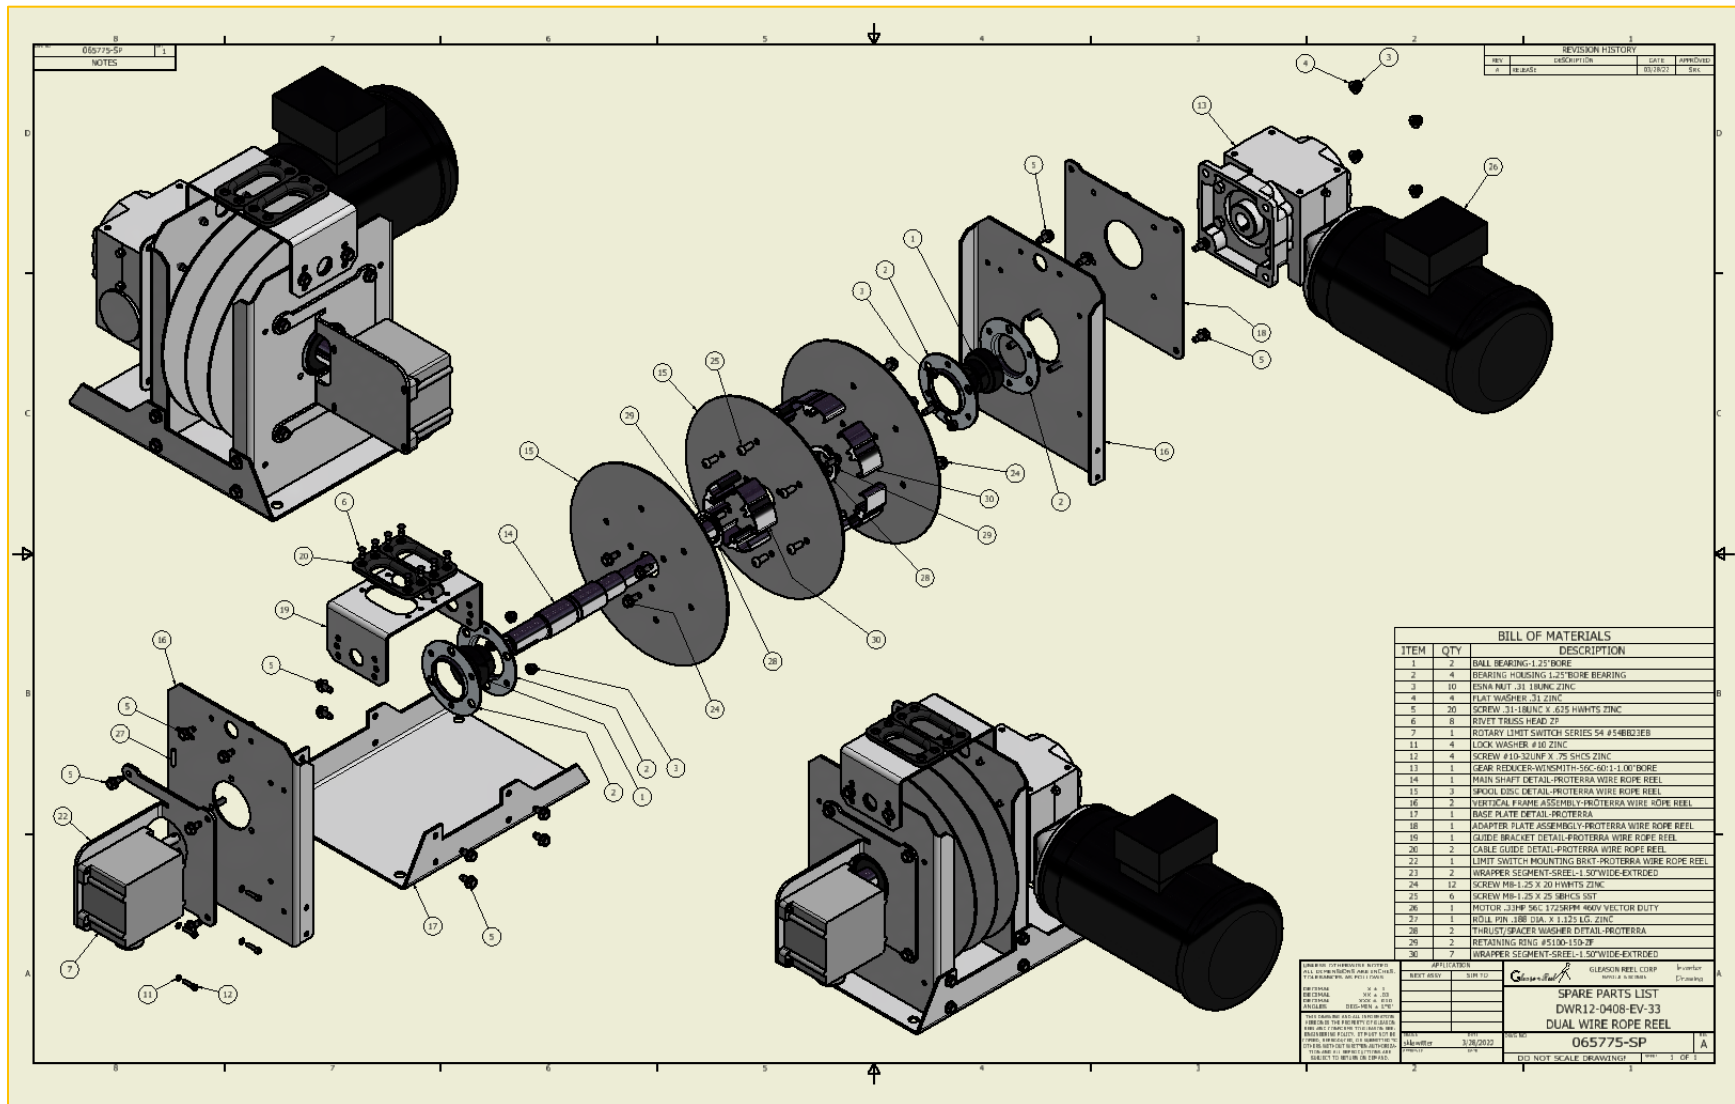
Dual Wire Rope Motor Reel—Exploded View
